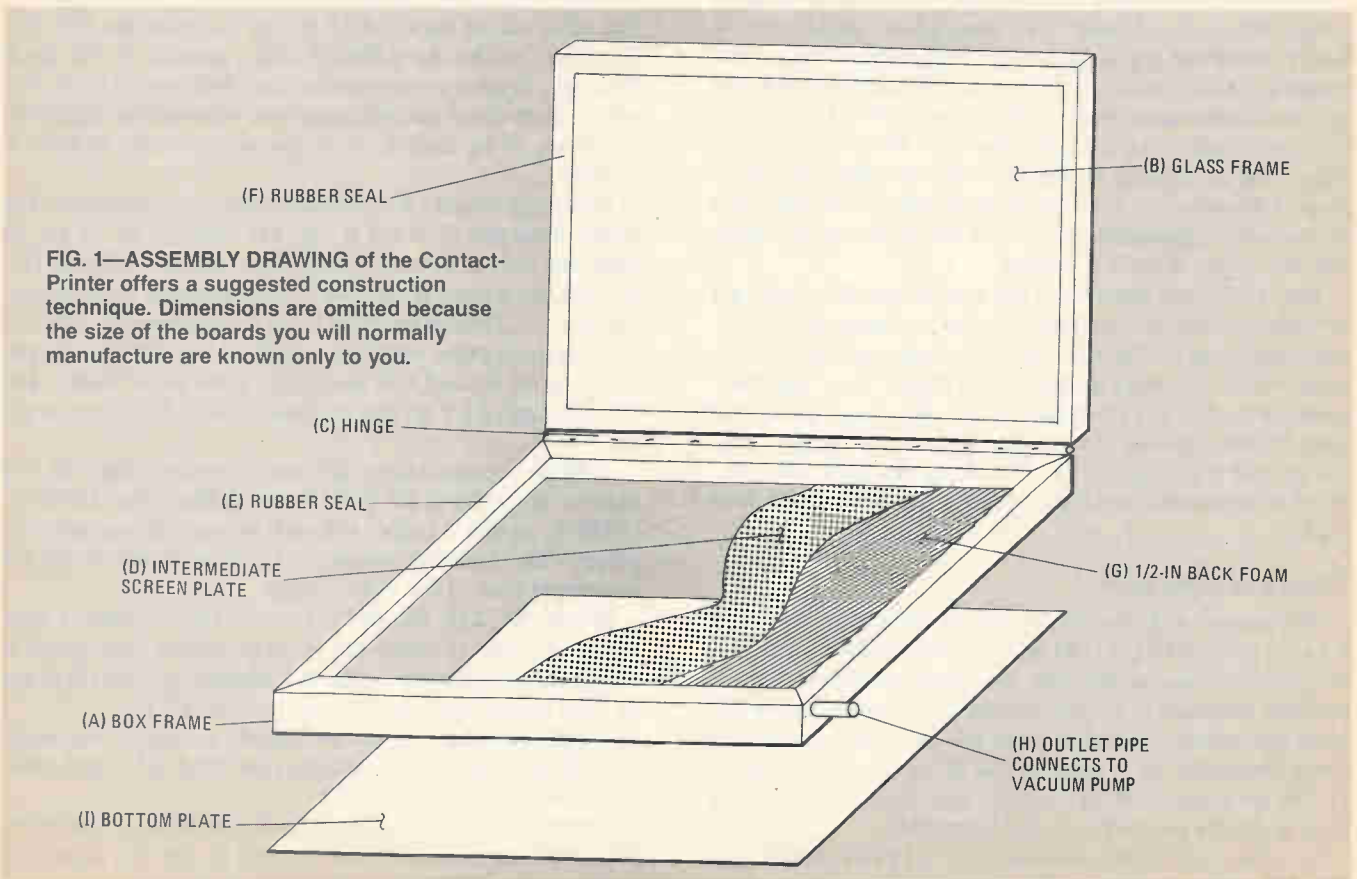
ASSEMBLY DRAWING of the Contact-Printer offers a suggested construction technique. Dimensions are omitted because the size of the boards you will normally manufacture are known only to you.
